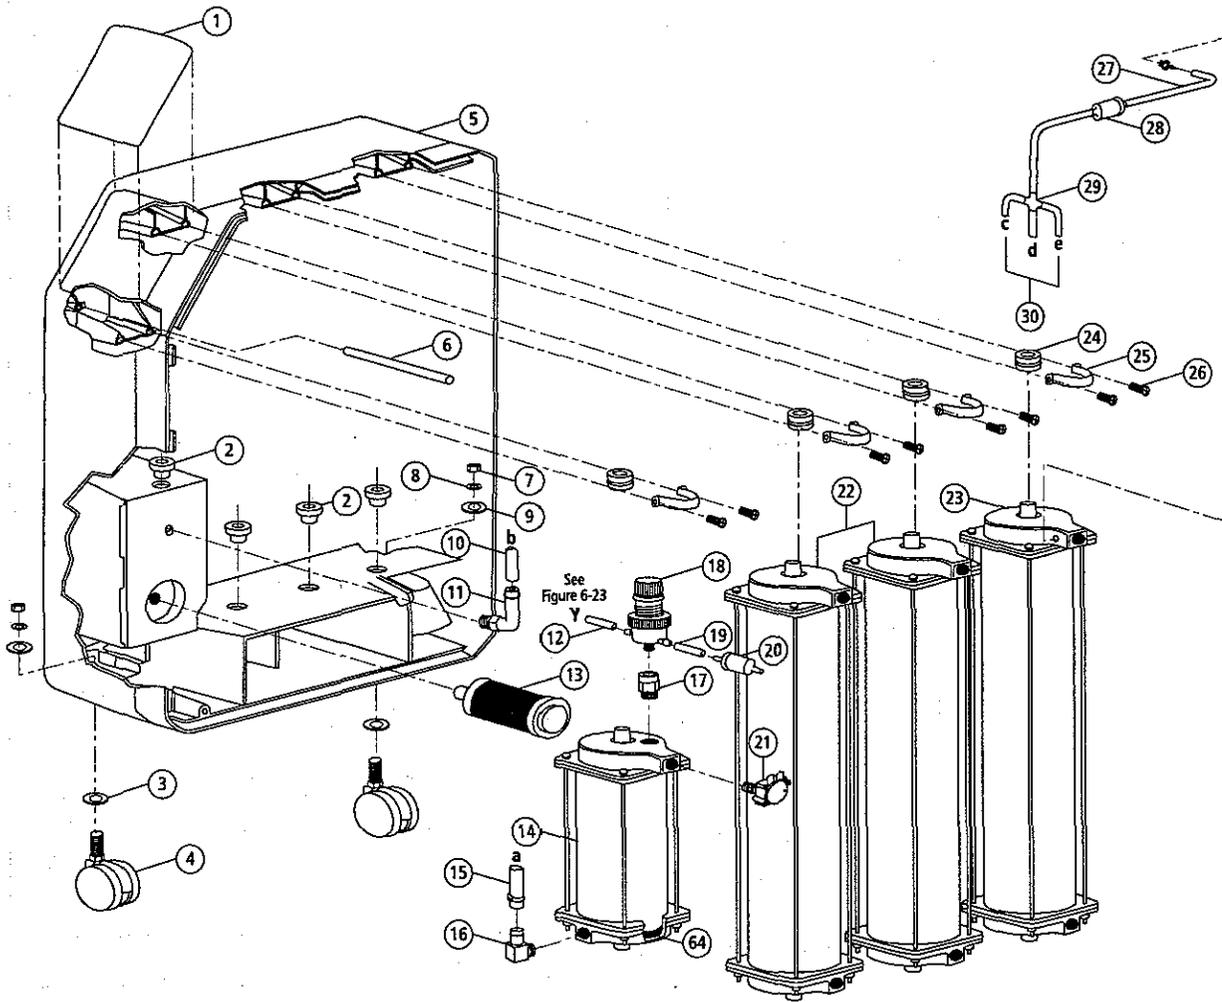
Left Cabinet Interior with Threaded Rod Sieve Beds
